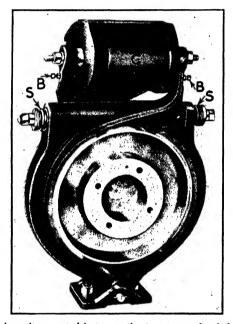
Brake coil mounted between the two top ends of the brake shoes.
